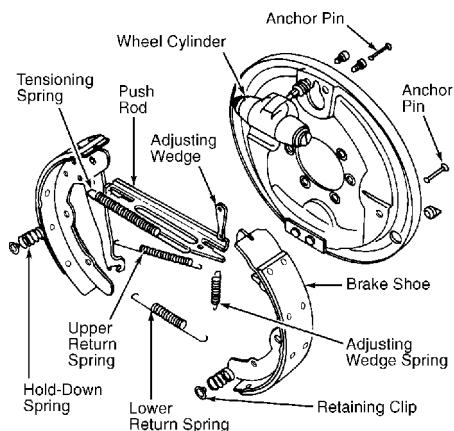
Identifying Rear Drum Brake Components (Typical)
